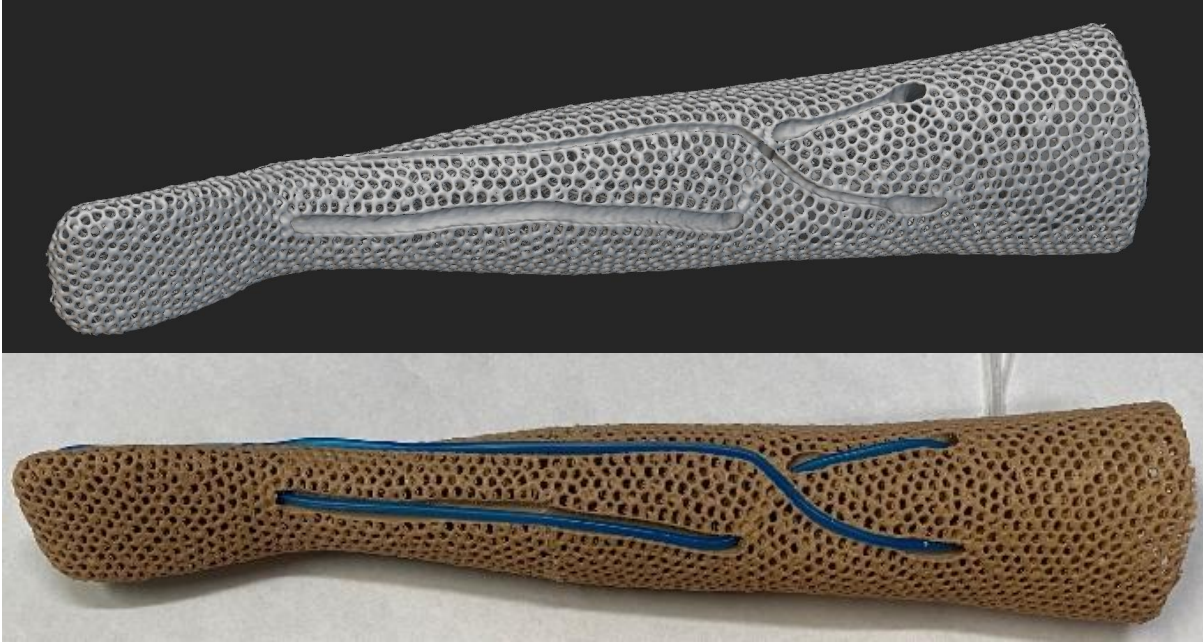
Bottom view of final core model: (a) digital lattice design and (b) physical prototype.
